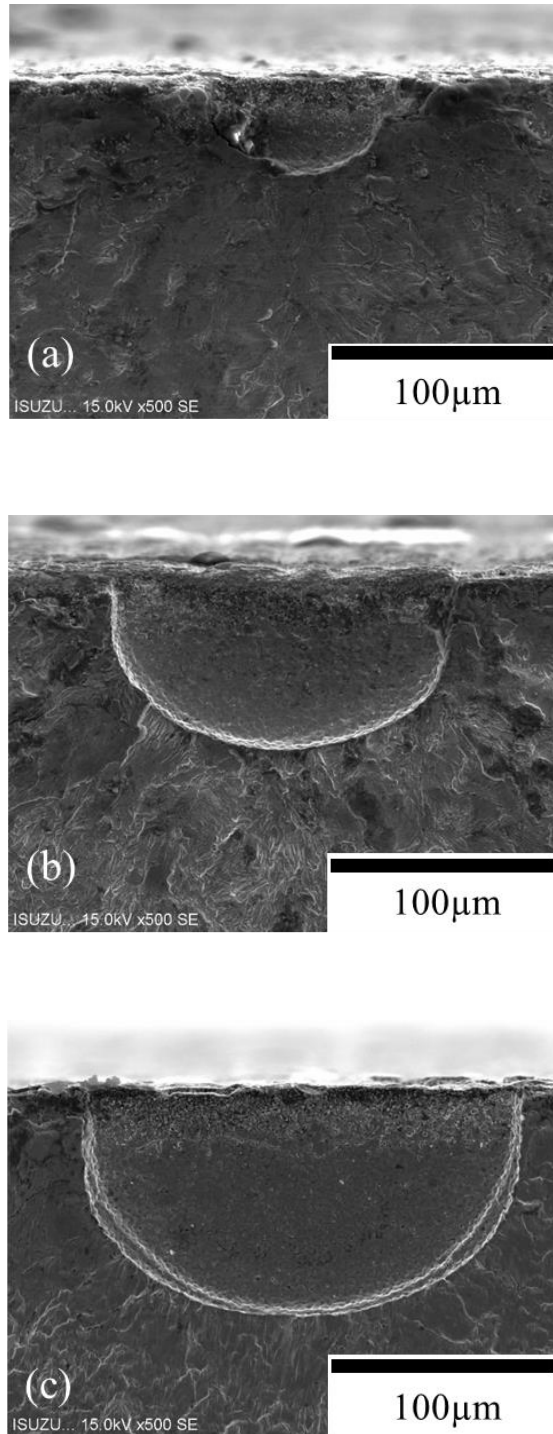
Typical fracture surface of specimen with a semi-circular slit.
